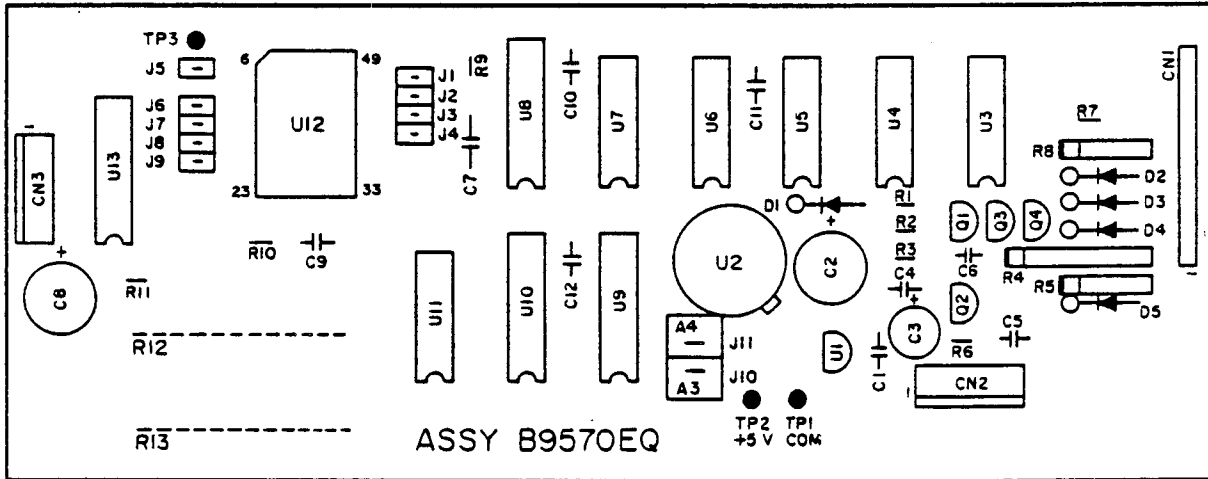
Chart Drive PCB Ass'y: B9570EQ Components Location Diagram.
